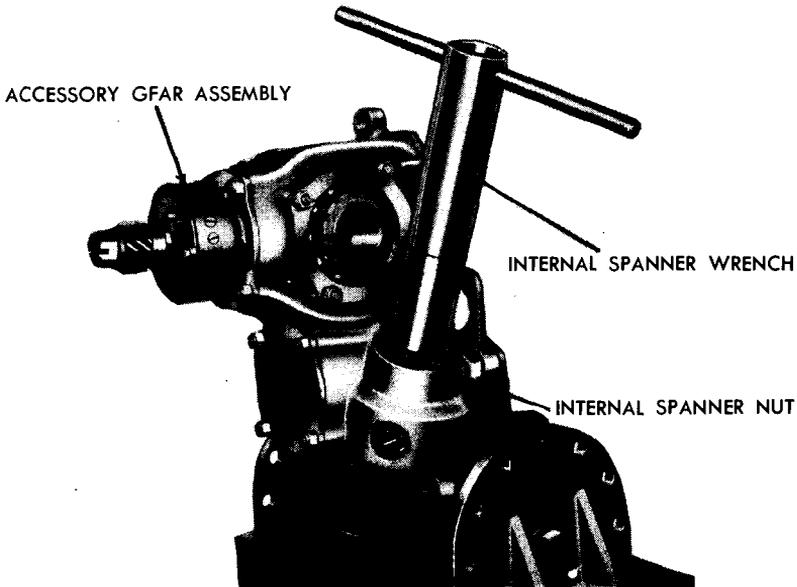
Accessory Gear Assembly Attached to Fixture
